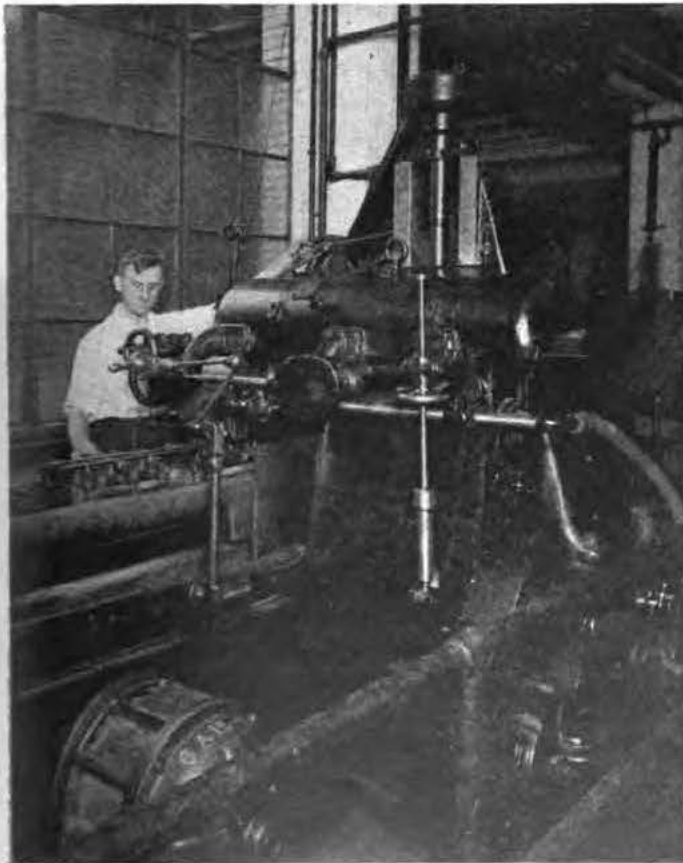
Example of a large grinding machine well guarded. All the guards shown in the lower right hand section of the photograph were added at Hawthorne to enclose gearing and other moving parts
